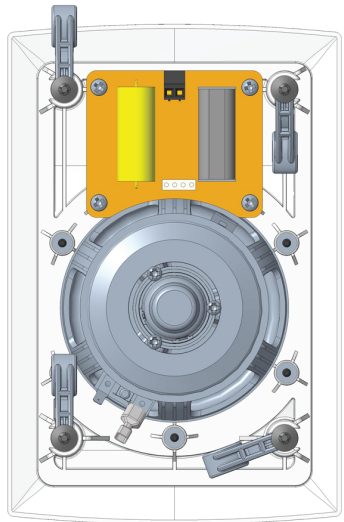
Clamps in the pre-install position (iW 4DC shown)
